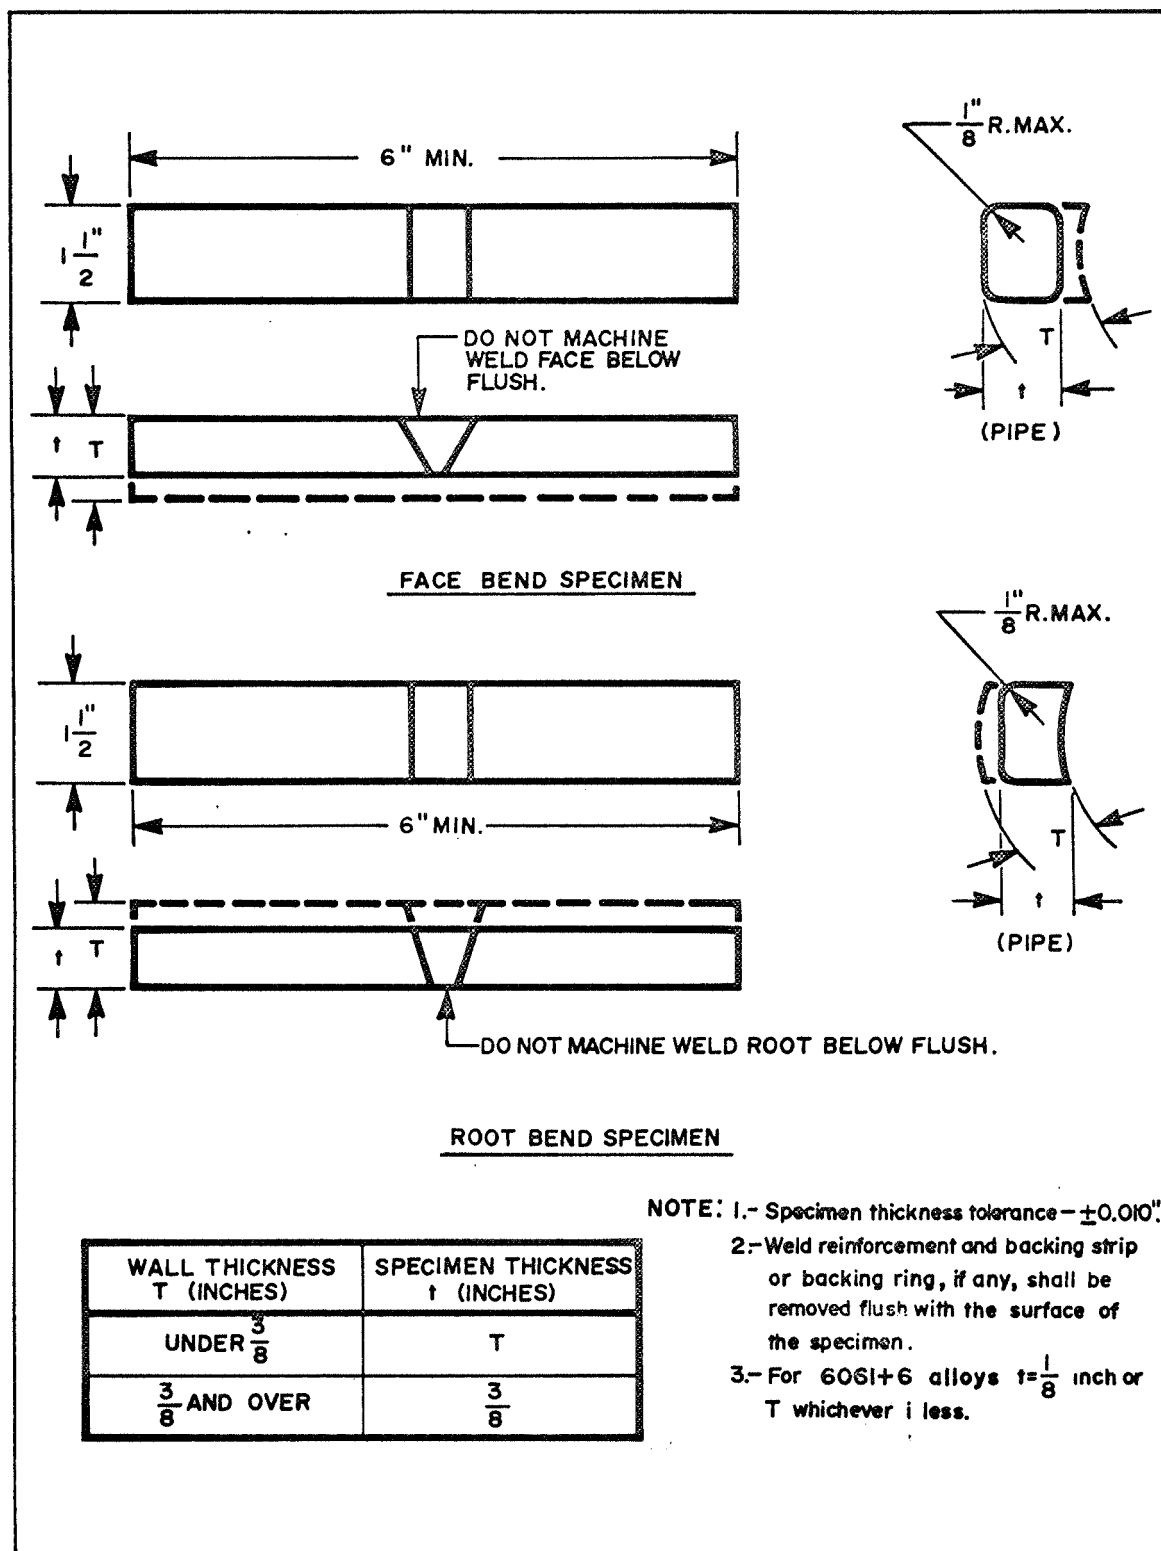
Transverse Face and Root Bend Specimens, Pipe
